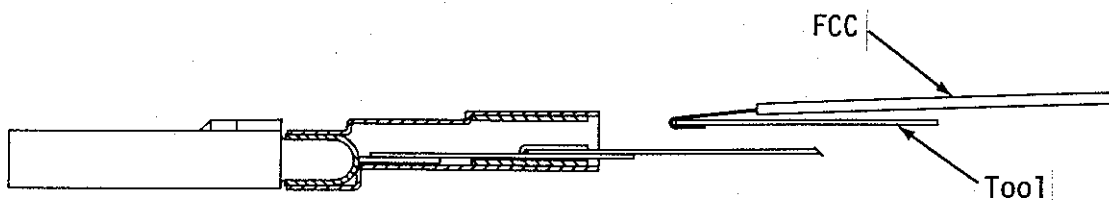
Use of Cable Insertion Tool to Aid FCC Insertion
